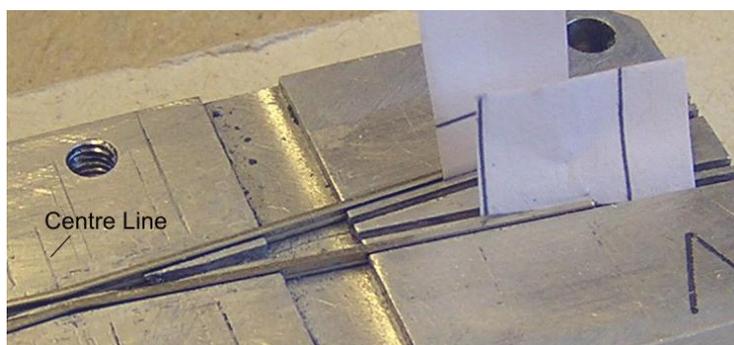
Packing out the wing rails with slips of paper to prevent them tipping during soldering. Note that the slips of paper are arranged to push the rails away from each other so that the gap at the knuckle is as wide as the jig will allow. This view also shows a scribed in line, labelled Centre Line, to indicate the centre of the knuckle for aligning the wing rails. (The other scribed lines on this jig were experimental)
